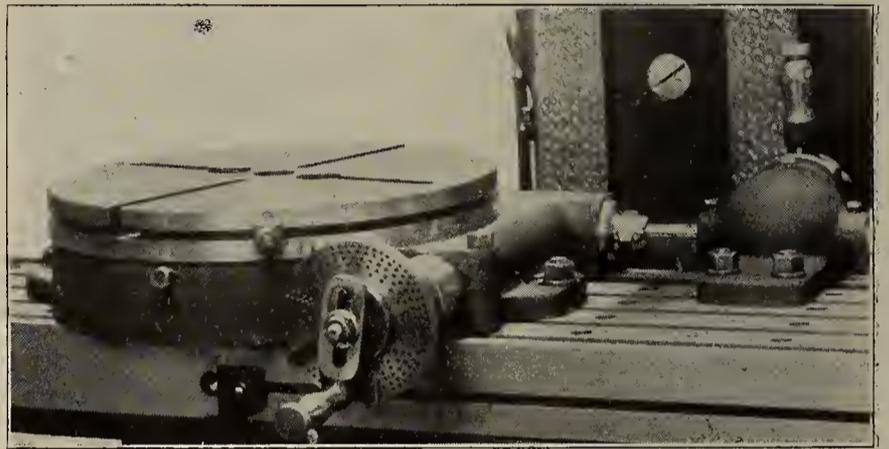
CIRCULAR MILLING ATTACHMENT.
